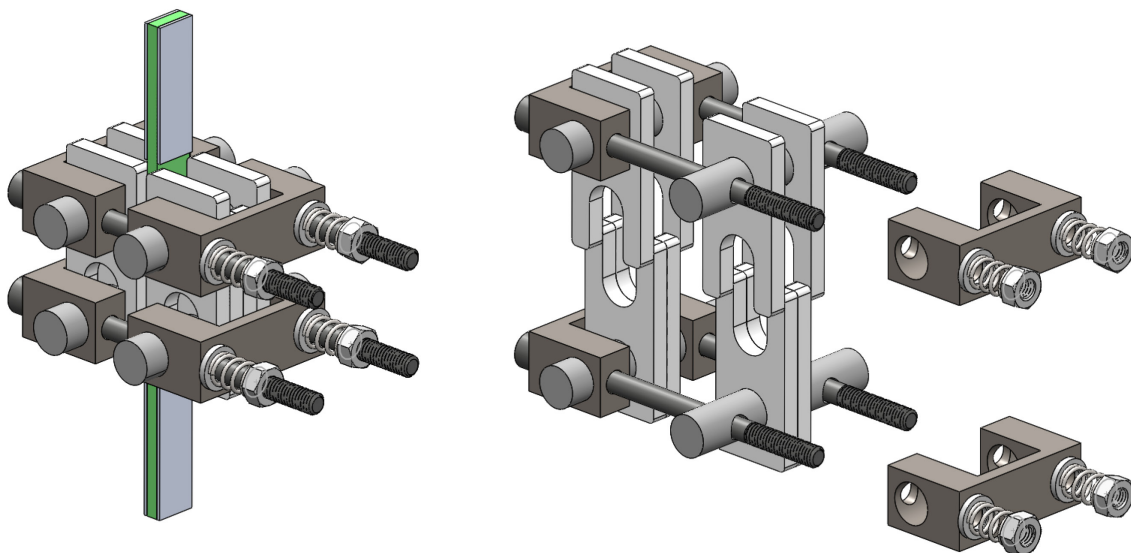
Unexploded (a) and exploded (b) schematic of the anti-buckling fixture used for quasistatic testing. This design could not be easily modified to incorporate a window for crack monitoring.
